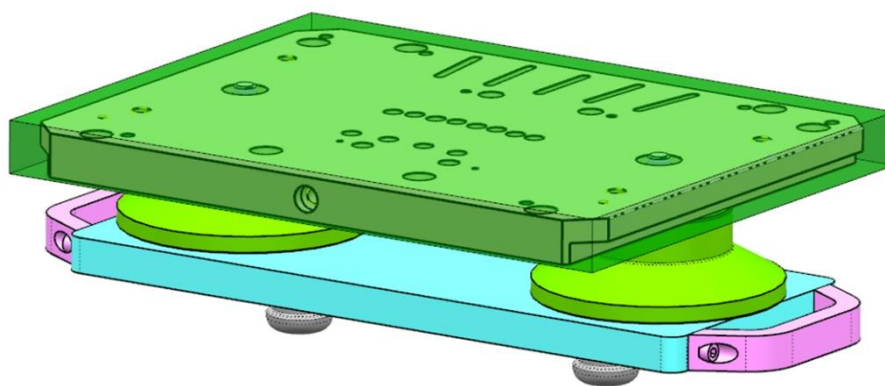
Technological scheme of the installation of the blank of the part "Stove" using pallets and extensions included with the standard equipment of the company SCHUNK
